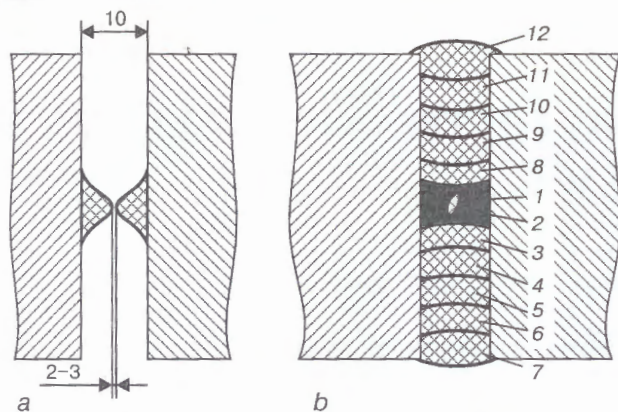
Scheme of joint with deposits, assembled for welding (a) and sequence of passes (b), indicated by figures
